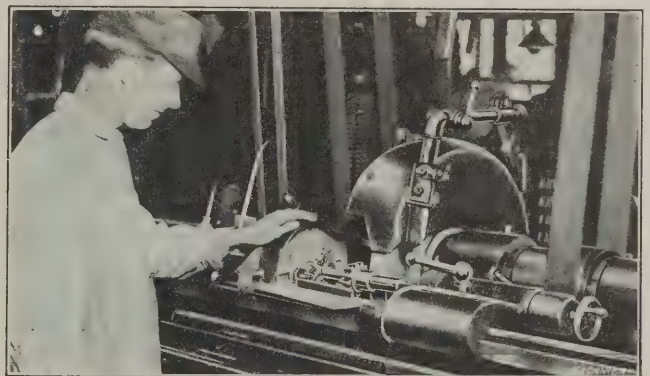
Grinding Bevel Gear Hub with a Wide-faced Wheel
